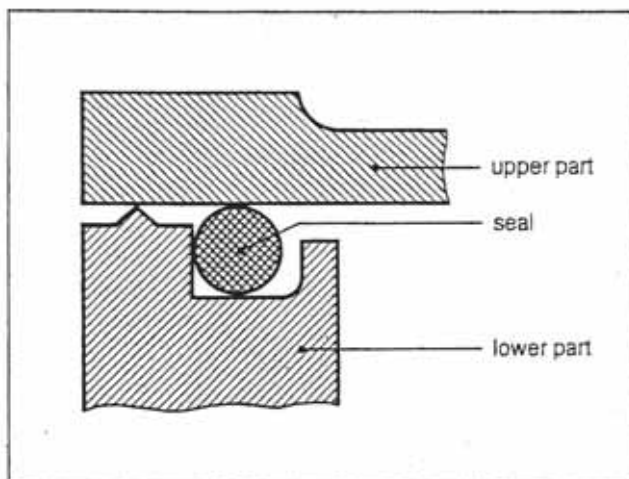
Ultrasonic welding of mouldings with inserted seal.
